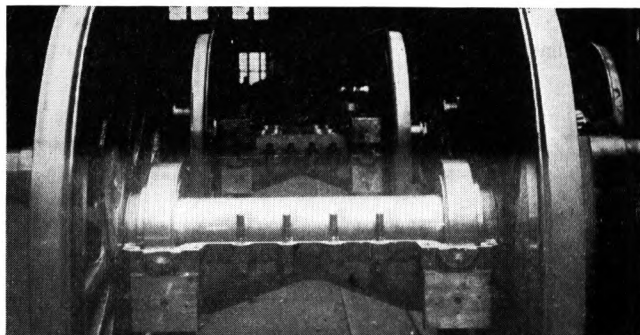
DRIVER MOUNTING TAPER BEARINGS AND LOWER HALF HOUSING IN POSITION
